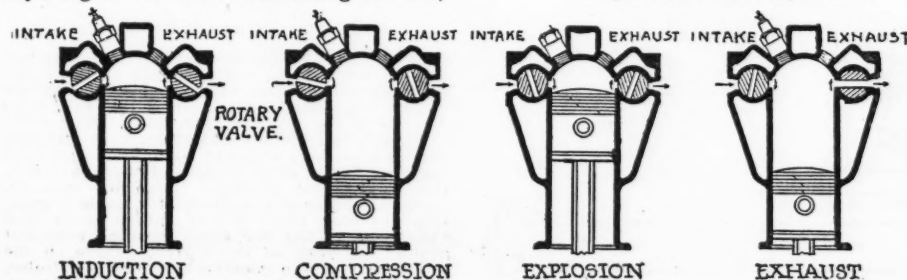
Operation of valves on the Speedwell type of rotary-valve engine, illustrating principle of the opening and closing of the ports
